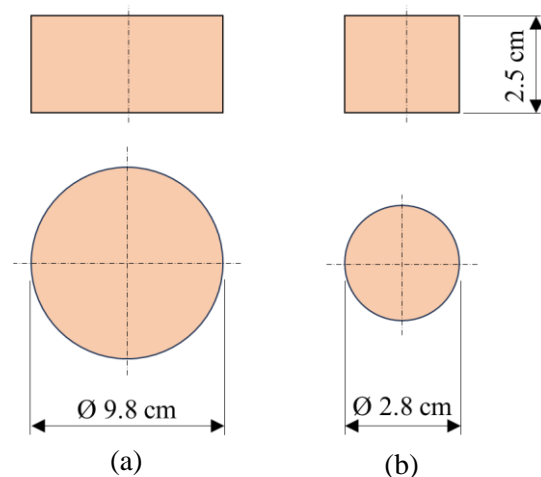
Specimen dimension [18] (a) low-sensitivity zone testing (b) high-sensitivity zone testing
